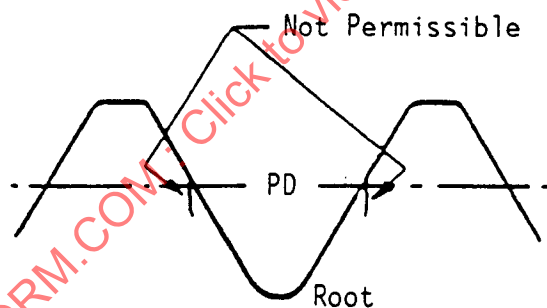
Laps Below PD Extending Toward Root, Rolled Thread
